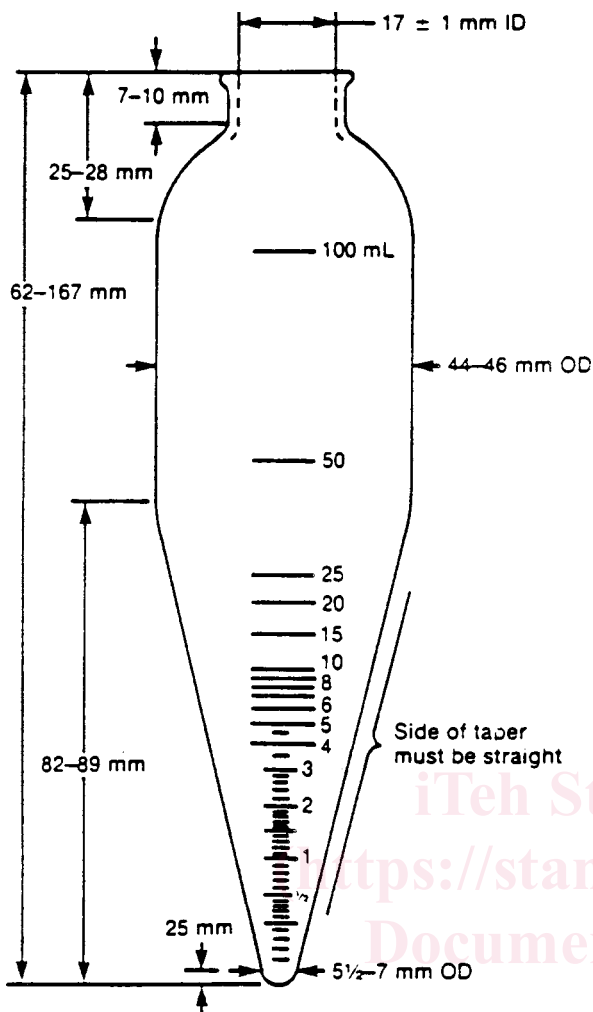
Cone-Shaped Centrifuge Tube, 167 mm (6 in.)
